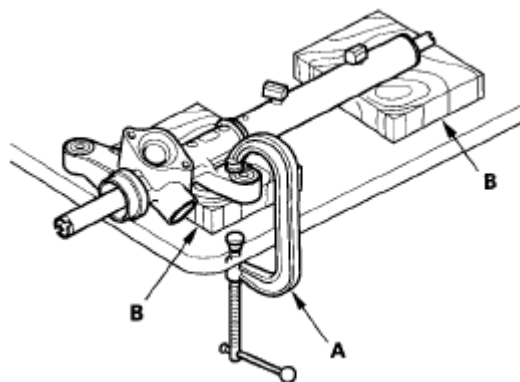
Identifying Gearbox Housing Using C-Clamp (Commercially Available)
